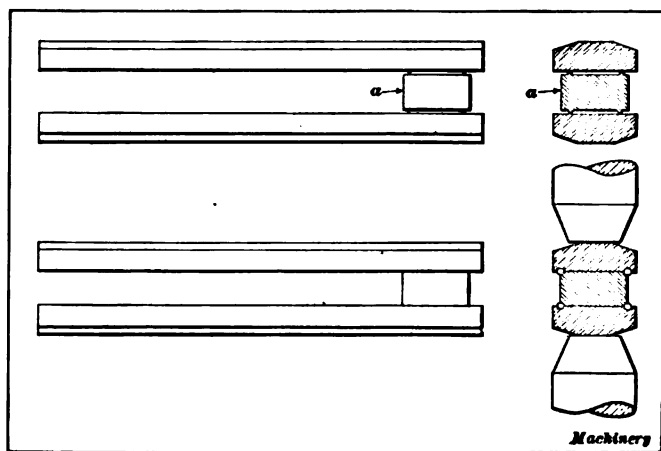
Diagram illustrating Principle applied in the Spot-welding of Telephone Transmitter Magnet Bars without drawing the Temper
